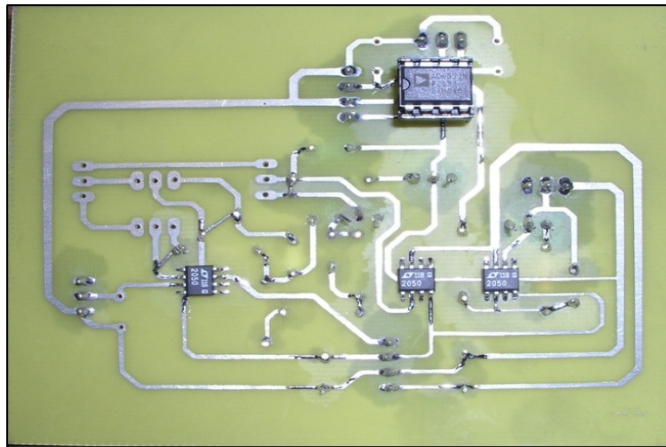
Bottom View of PCB for Analog Correlator type circuit
